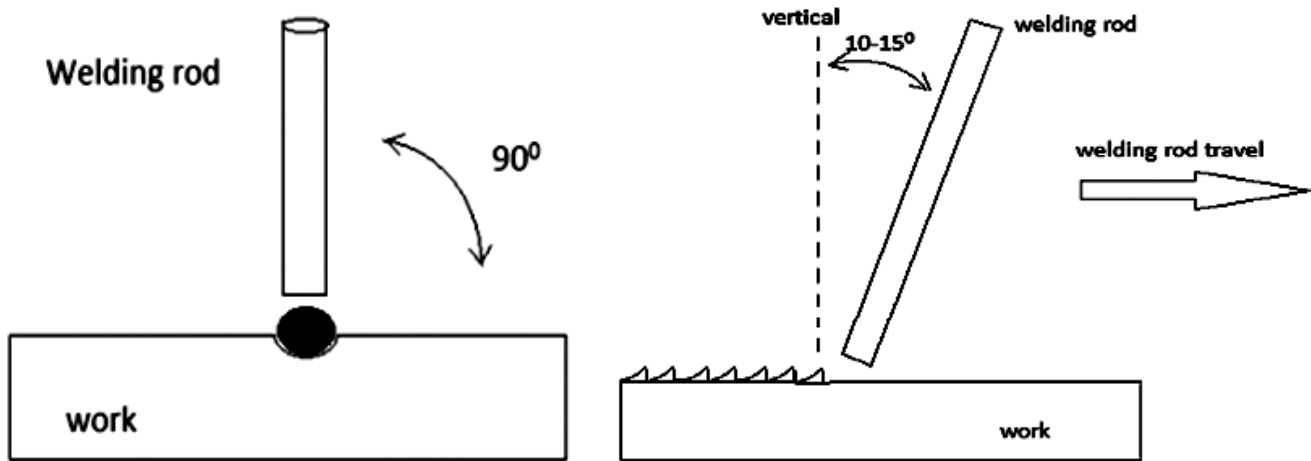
Welding in flat position (a) Front View (b) Side View
